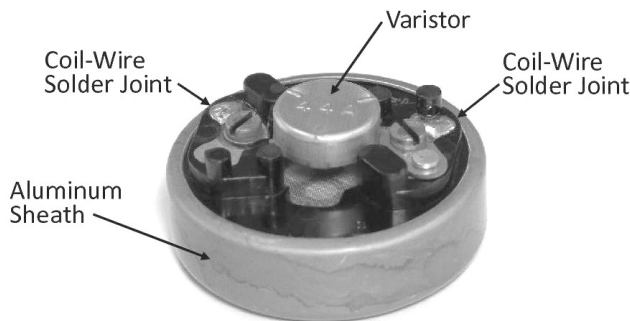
Bottom view of a U1 receiver. Fig. 3-10. Cutaway view of the top part of a U1 receiver.
